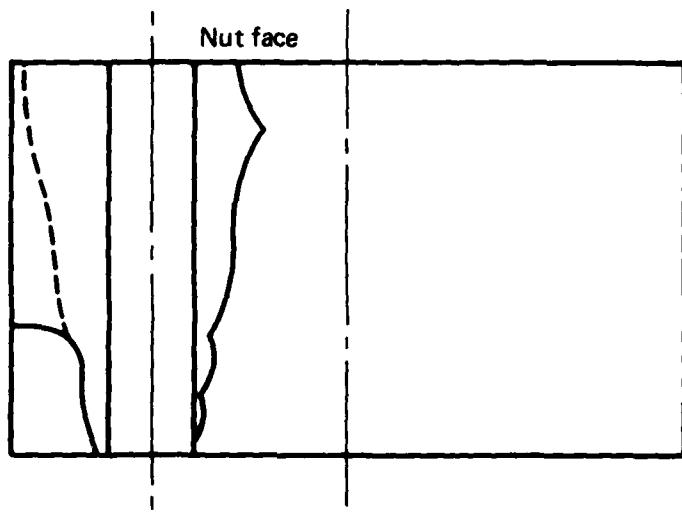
(c) FRACTURE SURFACES: SPECIMEN TYPE (C)
